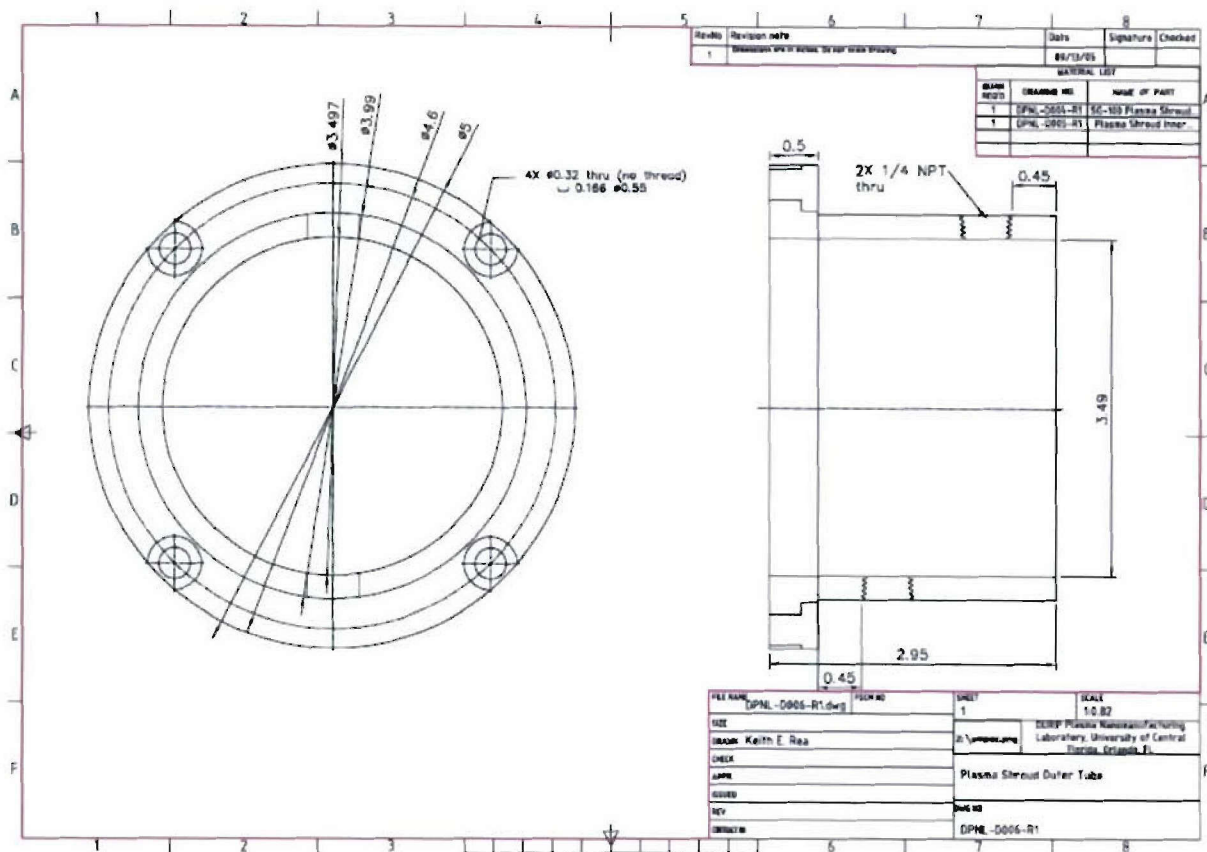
Orthographic view of the outer tube that houses the inner tube and connects the mounting plate.
